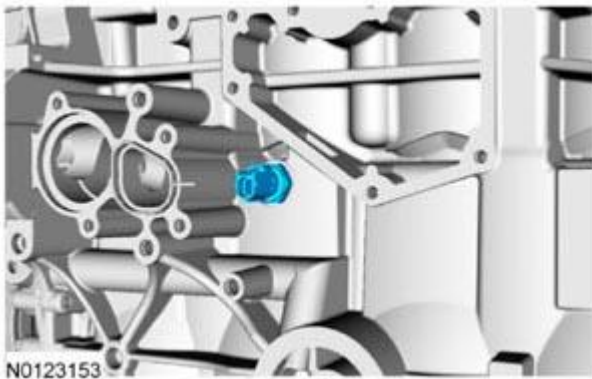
Identifying Engine Oil Pressure (EOP) Switch
